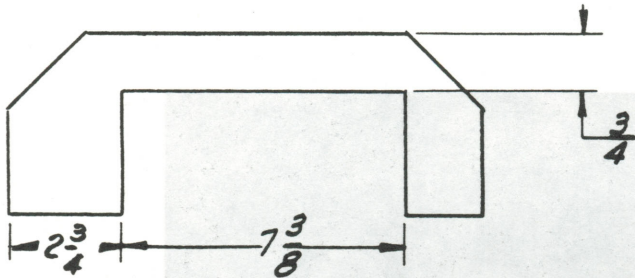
Feed-End View of Cover of Super Speed Cleatformer Model 8900
